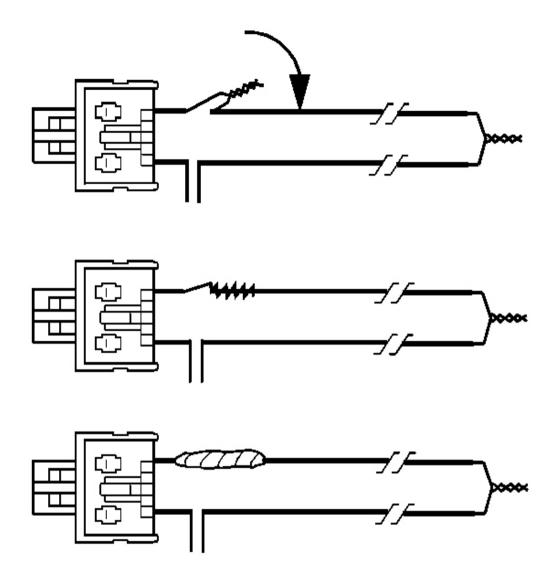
Insulating Connection With Electrical Tape Courtesy of GENERAL MOTORS CORP.
